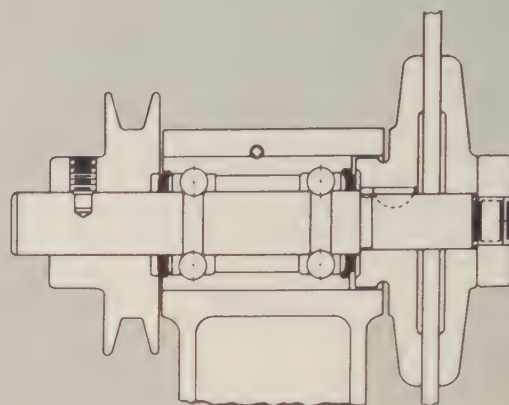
This is a cutoff machine mounting which uses a double sealed bearing of a type developed for automotive fan and water pump applications. This bearing is fitted with permanent, close fitting seals at both ends, thus eliminating any need for lubricating fixtures. An ample supply of lubricant is provided within the bearing to last for the life of the unit. As in the machine shown in Fig. 7a, the bearing housing requires simply a straight bored hole. A snap ring, engaging the bearing outer ring, positions and locates the bearing with respect to the housing. As a result of using this particular sealed bearing, there are several advantages in the design, such as (a) a smaller number of parts, (b) easier, more accurate machining, and (c) simpler, quicker assembly with service requirements practically eliminated.
